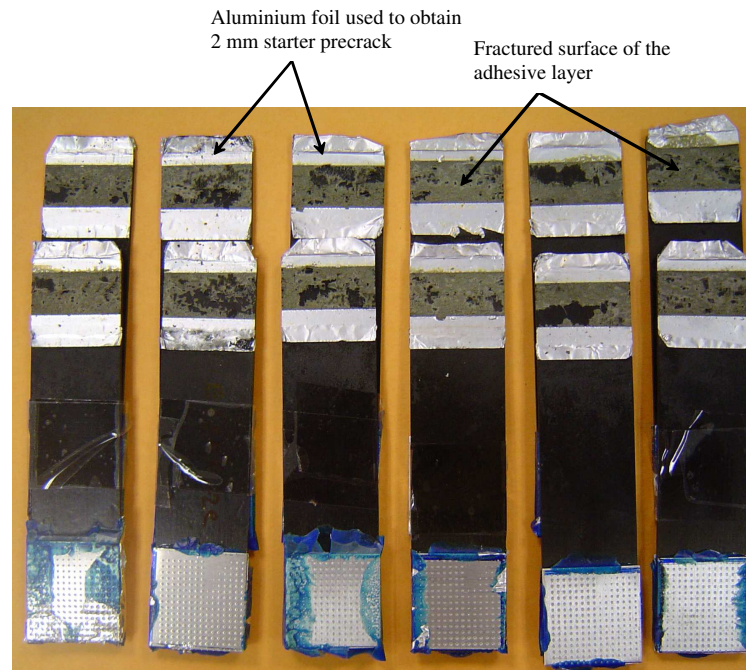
Photograph of fractured surfaces of adhesive in the modified single lap joint (MSLJ) test specimen.
